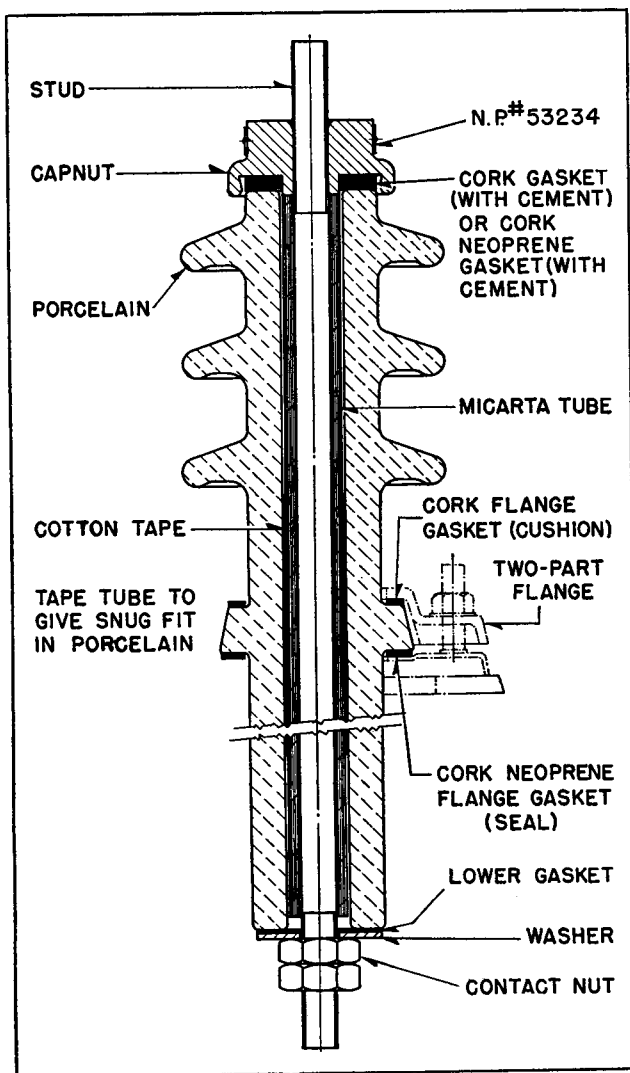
Cross Section of a Typical Bulk Type Bushing.
